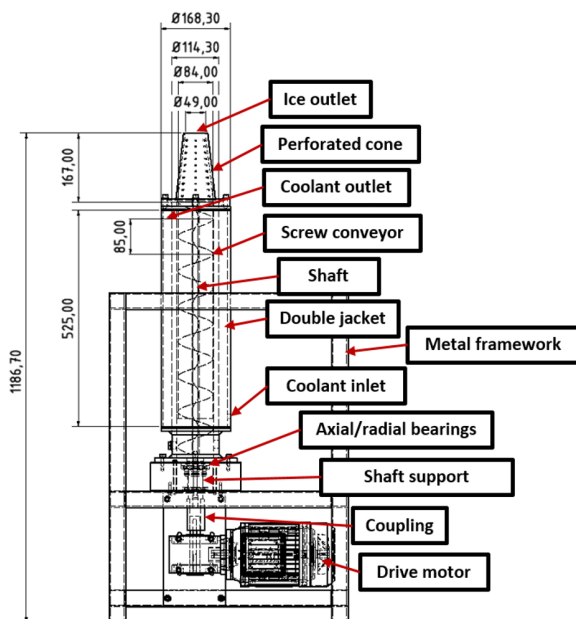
Technical and sectional drawing of the screw crystallizer with integrated pressing section
